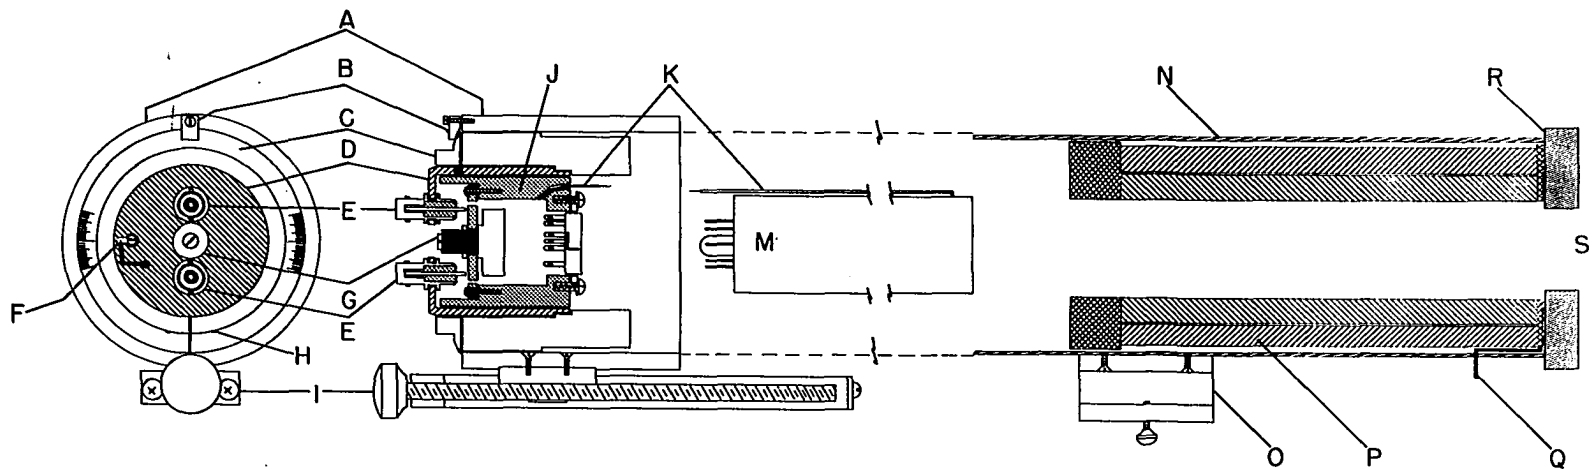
Scale drawing of housing for F-4011 image-dissector, multiplier phototube
